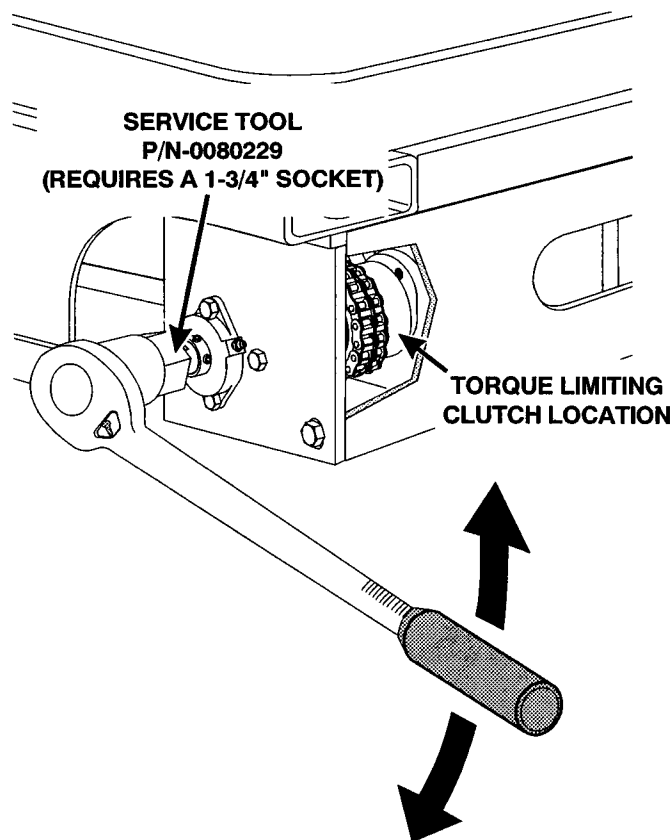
Check Torque Limit Clutch - Torque Setting.
